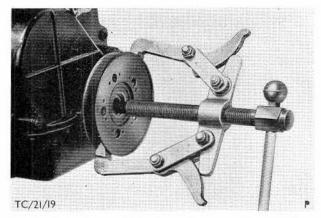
Pull off crankshaft pulley using Special Tool 6132-A.
